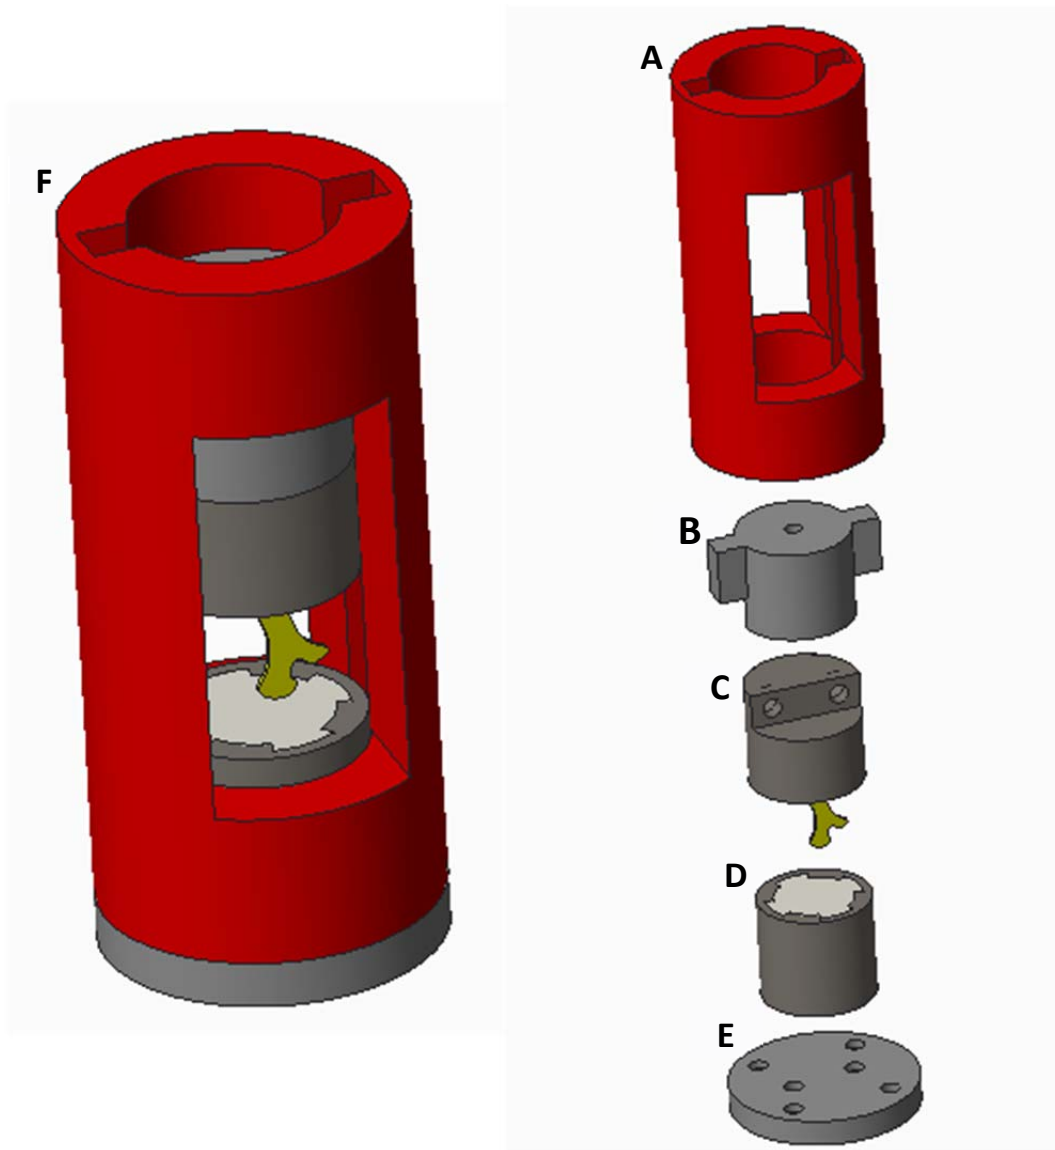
(A-E) The exploded 3D assembly of the imprinting rig. (F) The fully assembled imprinting rig including a sample femur.
